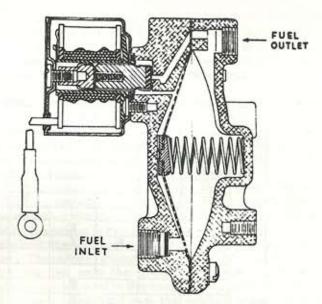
SECTIONAL VIEW OF FUEL SAFETY VALVE
